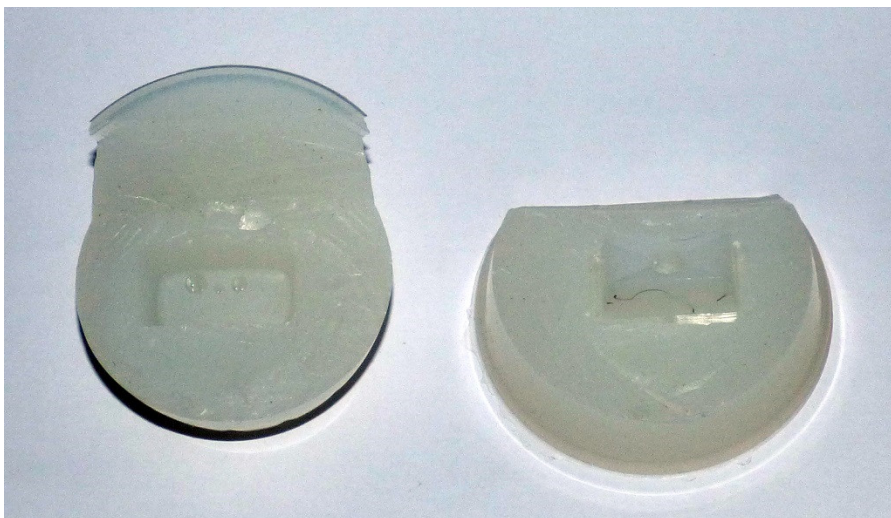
The silicon rubber mold for the key cap was cast in one piece and later cut open with a sharp knife.
